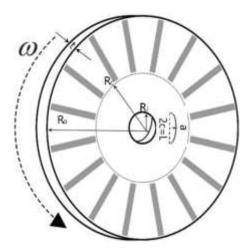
Schematic figure of a circumferential crack in a grooved rotating disc
